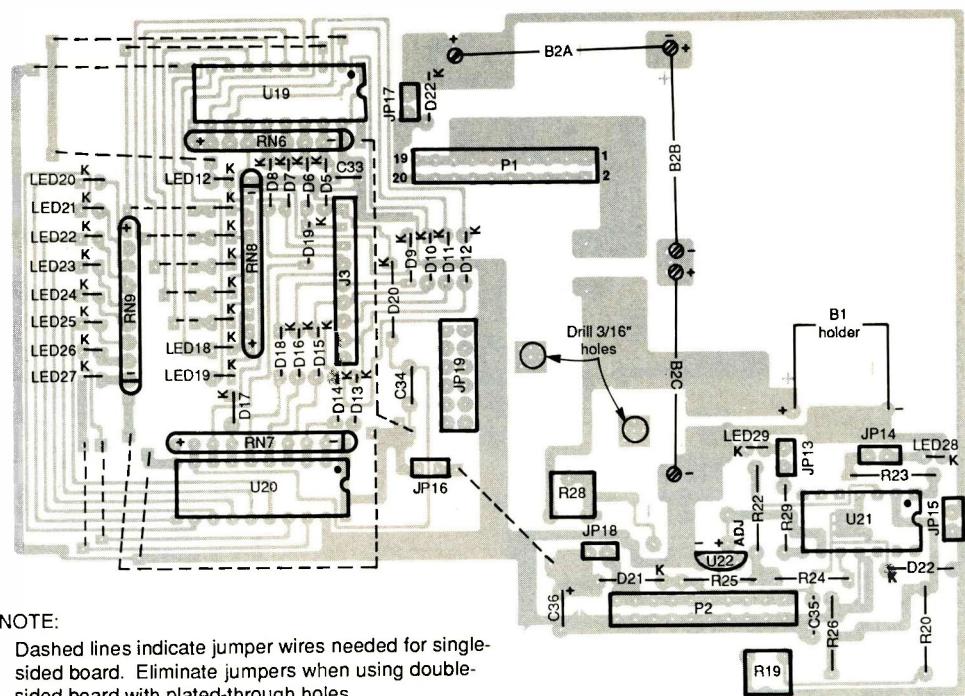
Wiring guide for pc board. If you make your own single-sided board, eliminating the component-side conductors, install the jumper wires represented by the dashed lines.
